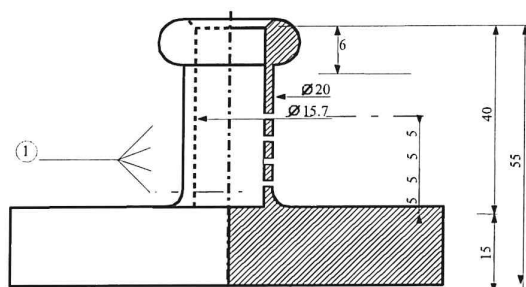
Hollow bronze cylinder, closed at one end; Plan and cut dimensions in mm
